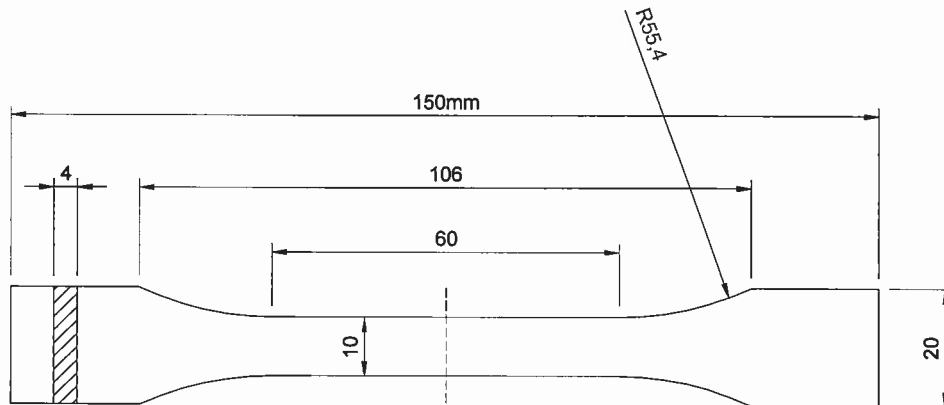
Shape and dimensions of the test specimens (type 1B - ISO 527-2, 1993).
